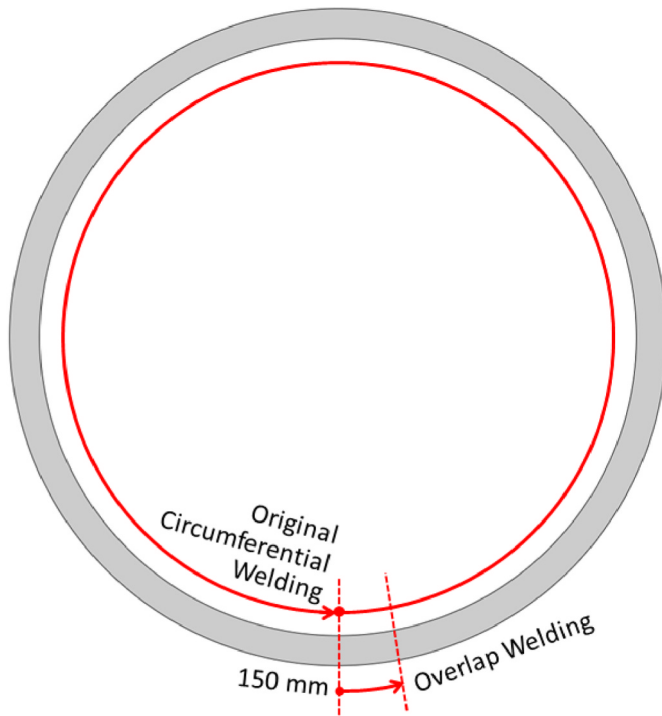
Illustration of the overlap EB welding that travels over 150 mm from the stop position of the original circumferential EB weld on the weld plane.
